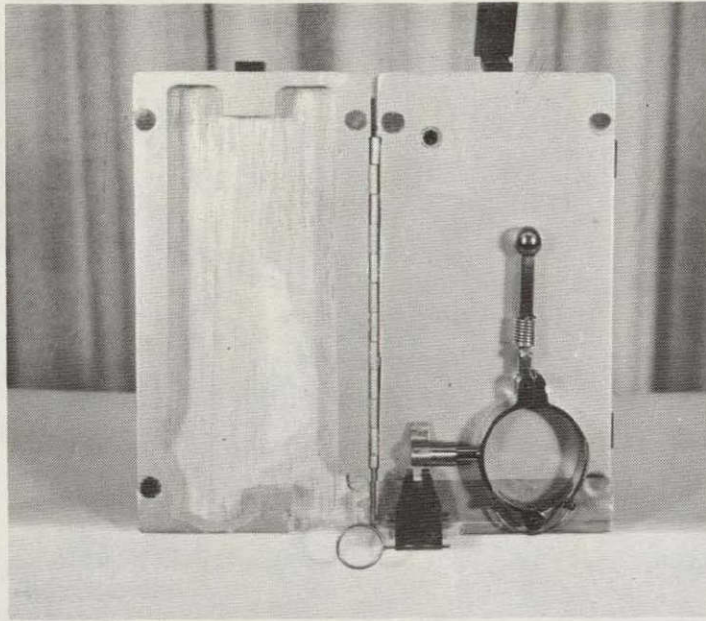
Modified Mock-up Clamp Assembly
